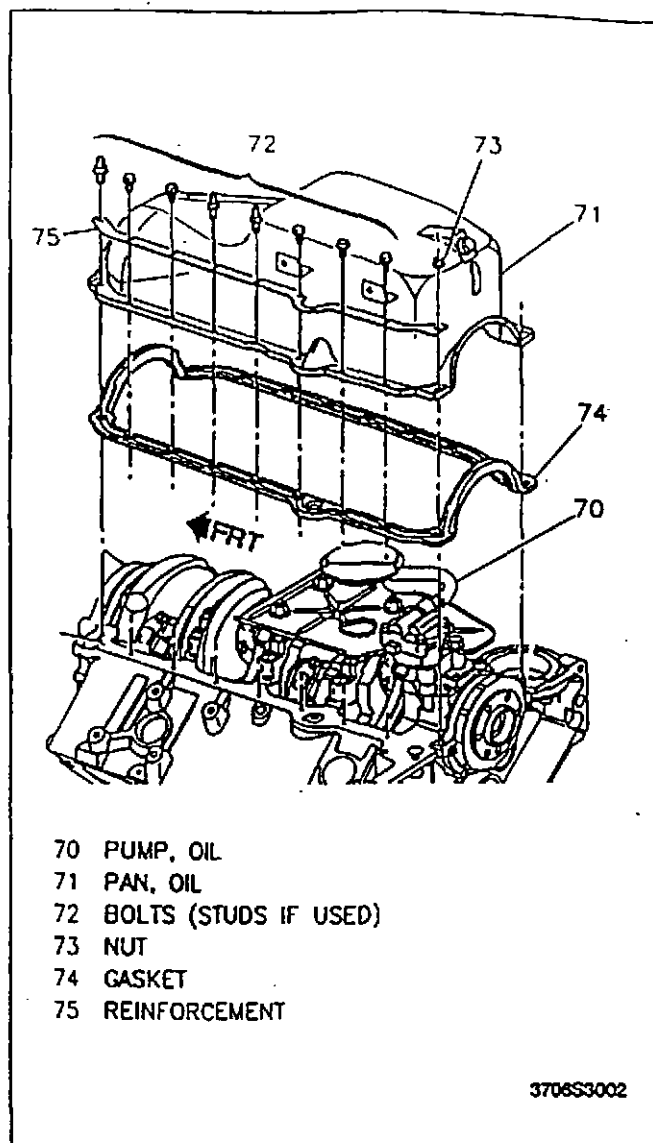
Oil Pan (5.0L and 5.7L Engines)
